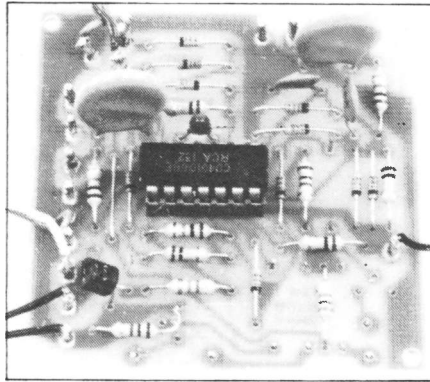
Wiring to Burglar Alarm and External Horn PCBs
